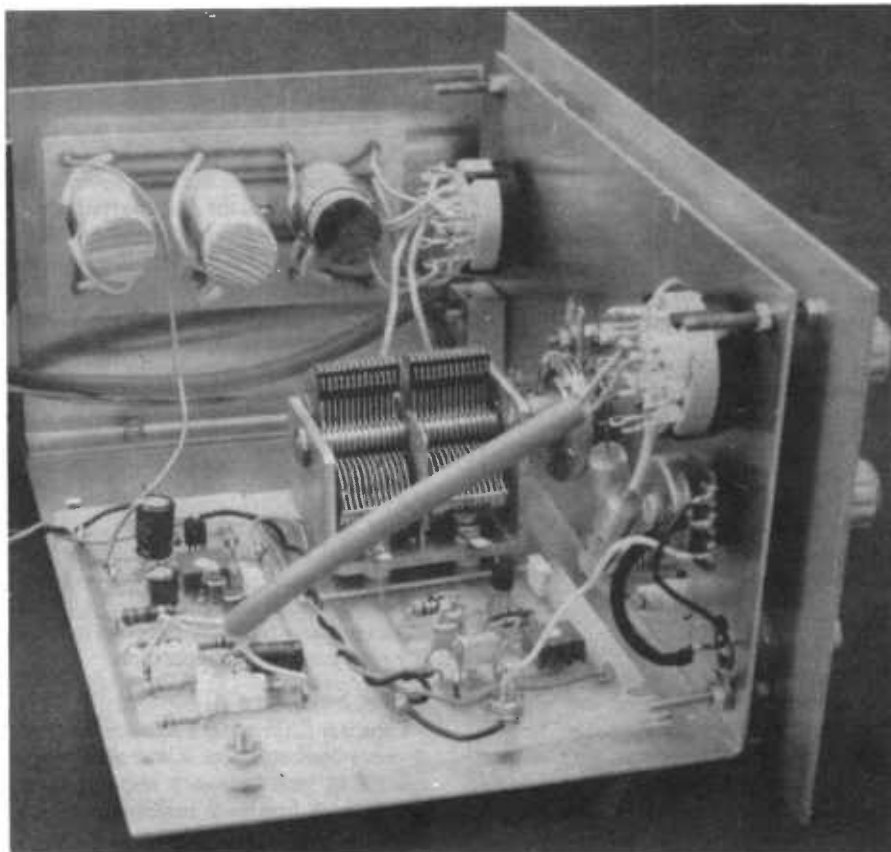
Details of the coil board aluminium bracket and position of the coil board.
